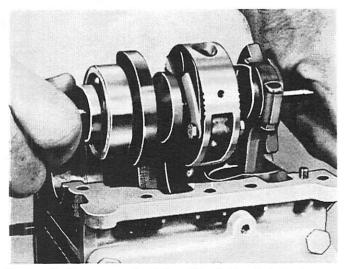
Removing (and Installing) Crankshaft Assembly from Cylinder Block
